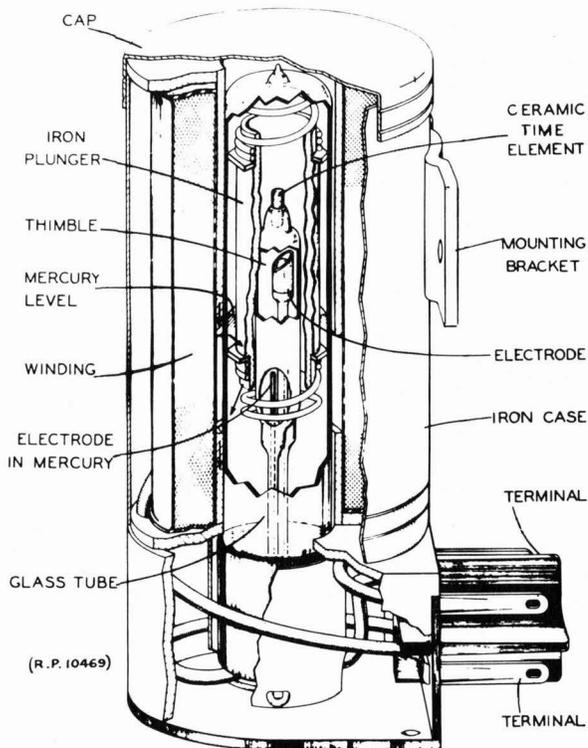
SECTIONAL VIEW OF KS-7802 RELAY
